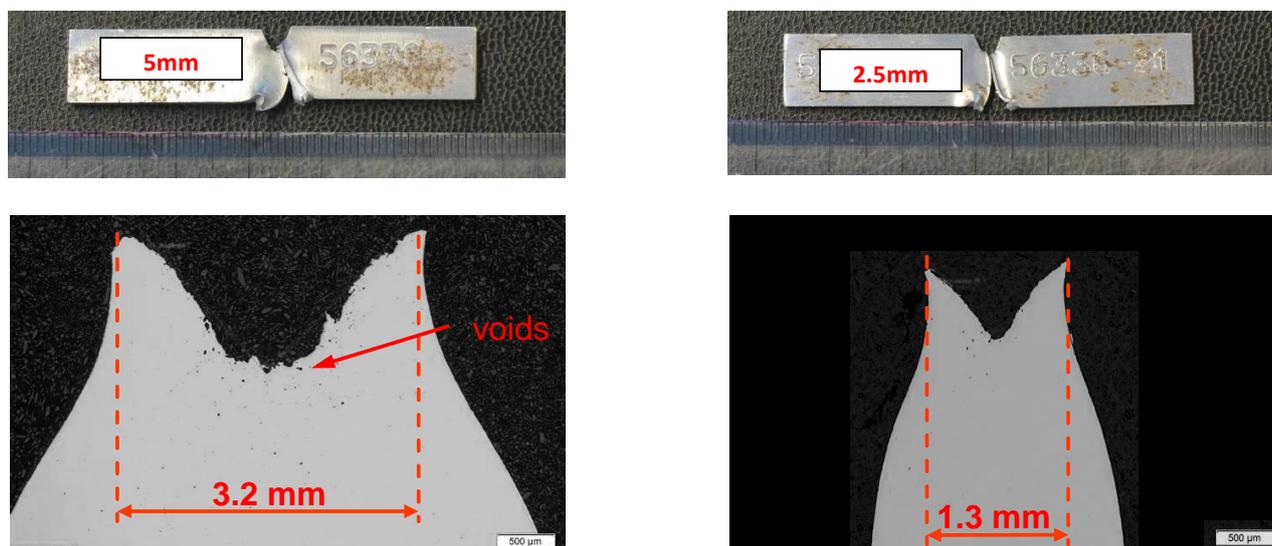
Reduced thickness CVN specimens after impact testing. The bottom pictures show a section view of the slanted fracture surface with two shear lips.
